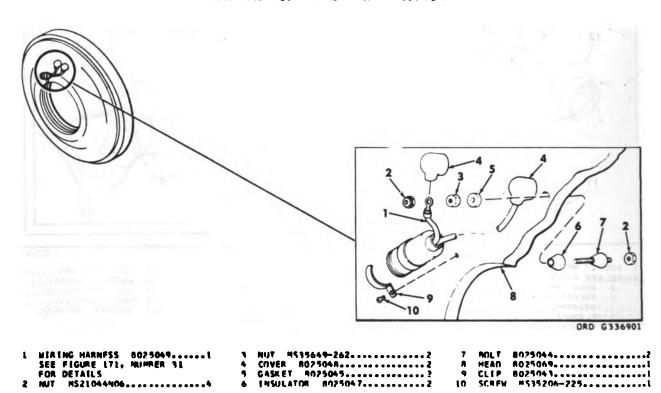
HEAD ASSEMBLY /A029012/ /SEE FIGURE 137 FOR NEXT HIGHER ASSEMBLY/
